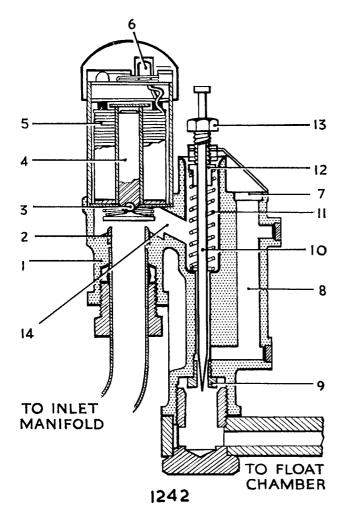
Sectioned view of the auxiliary starting carburetter.
